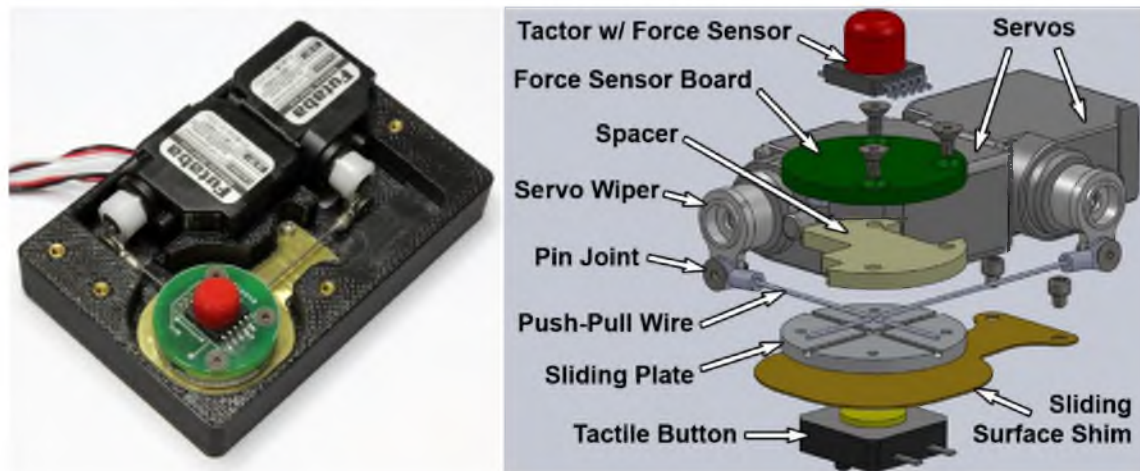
Completed low-profile skin-stretch display with top cover removed (left). Exploded internal view of actuation and sensor components of LPSSD (right).
